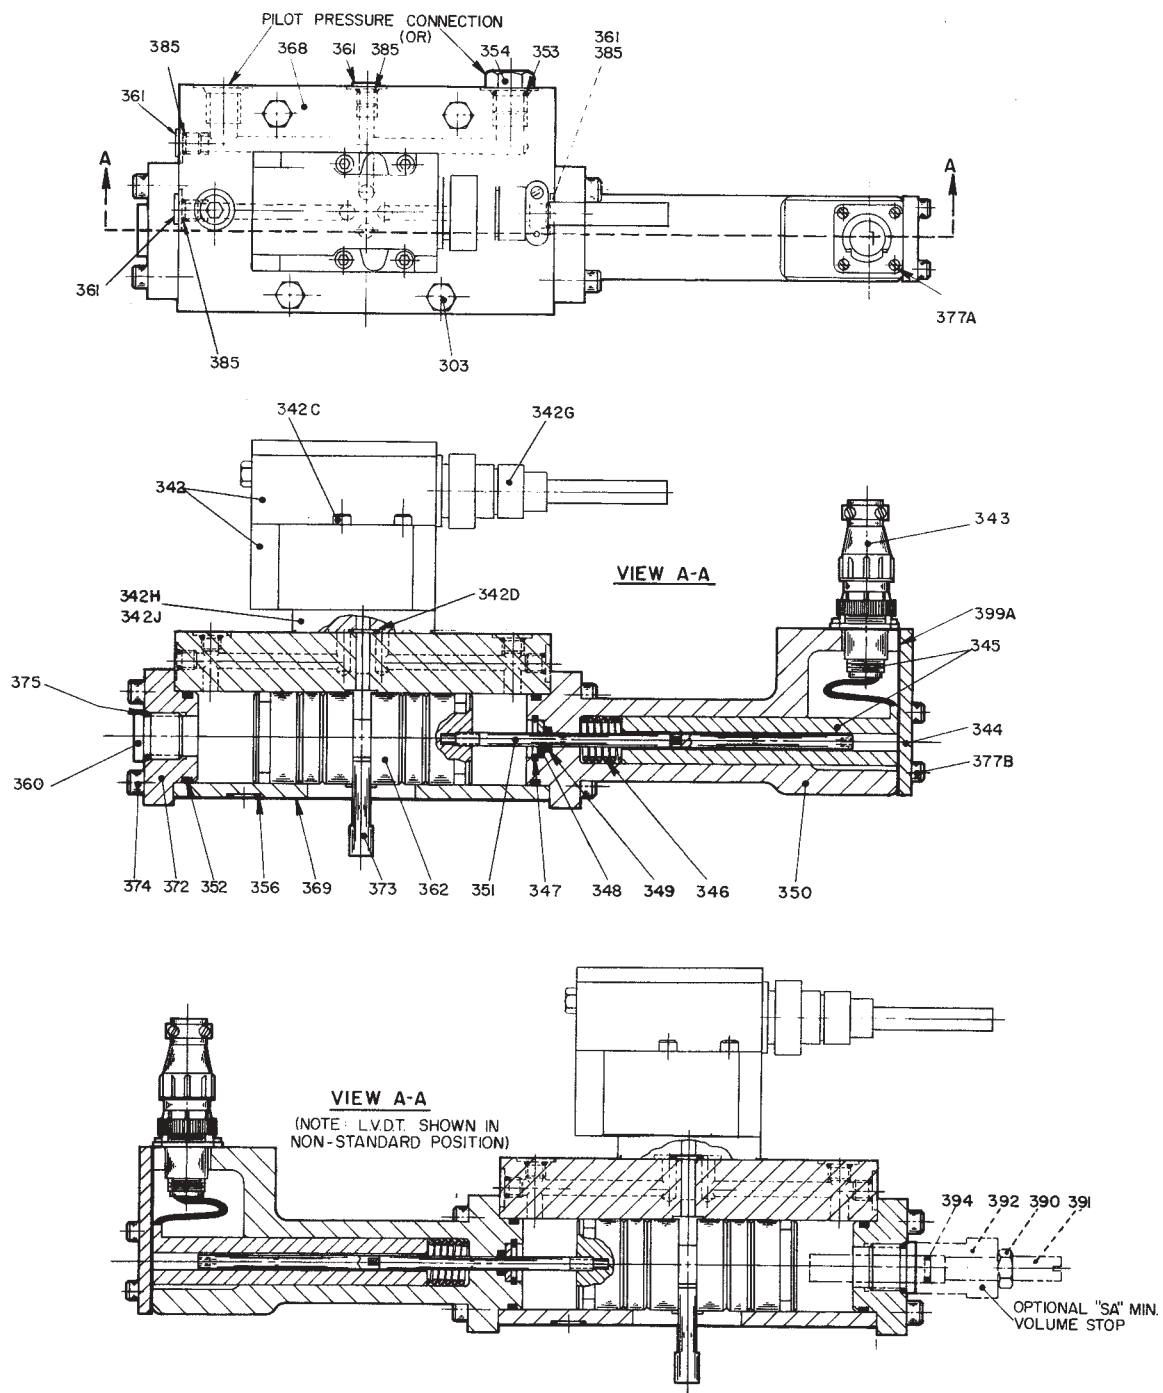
Parts Drawing, Oilgear Type "VV" Control (E51321).
